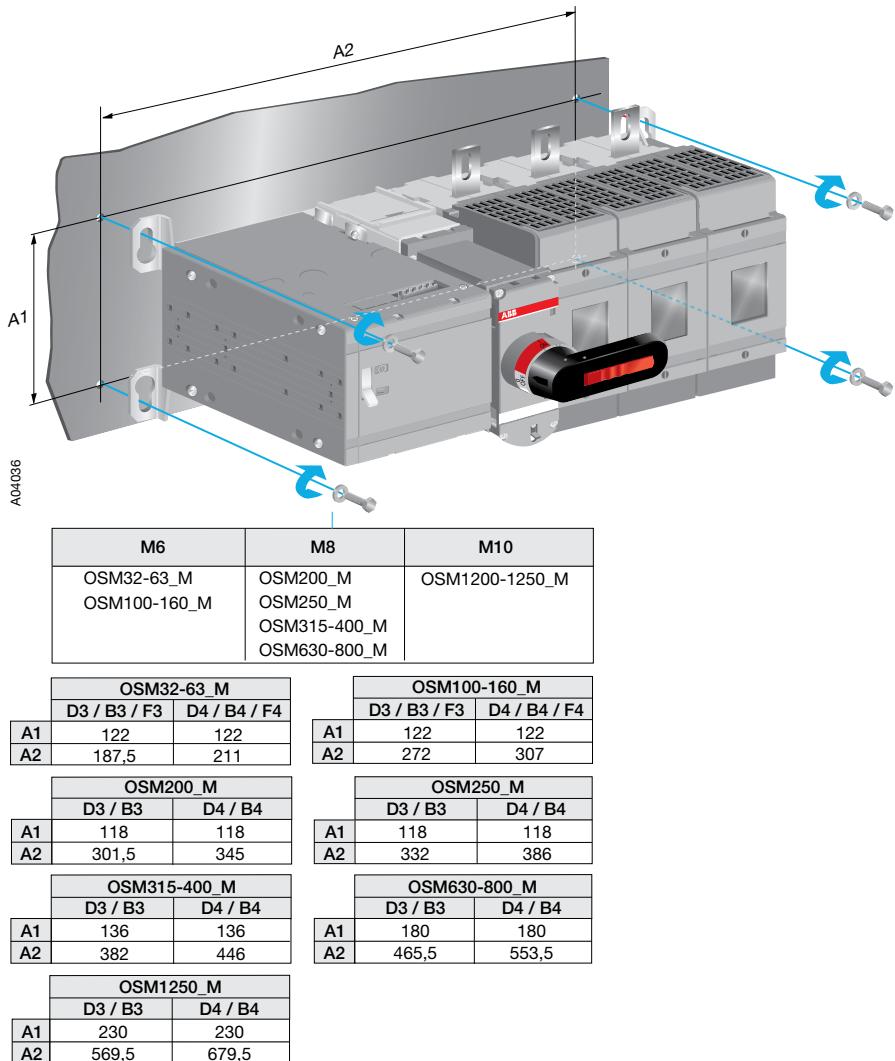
Motorized switch fuses, drilling hole distances / screw-mounting, [mm]
